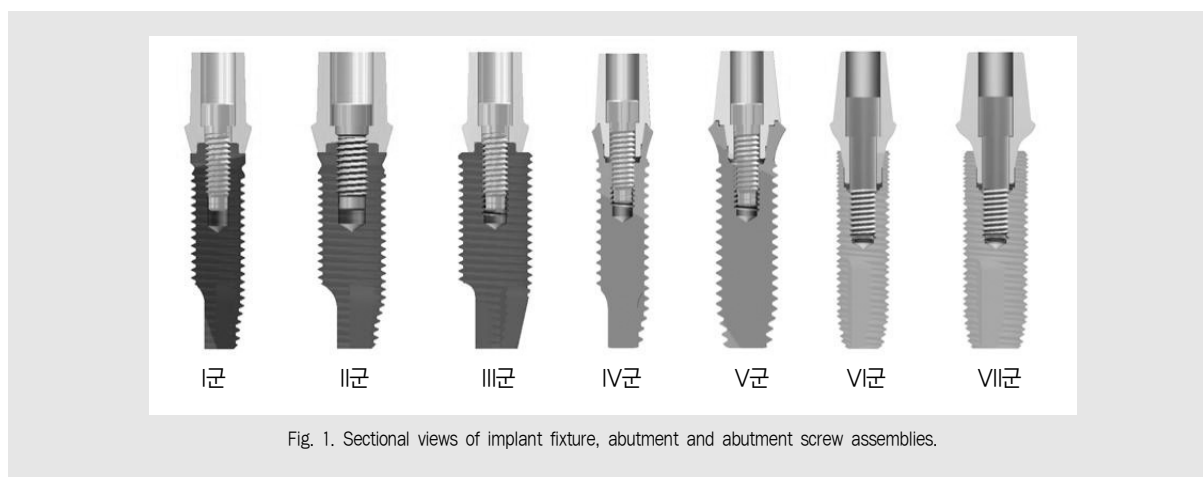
Sectional views of implant fixture, abutment and abutment screw assemblies.
